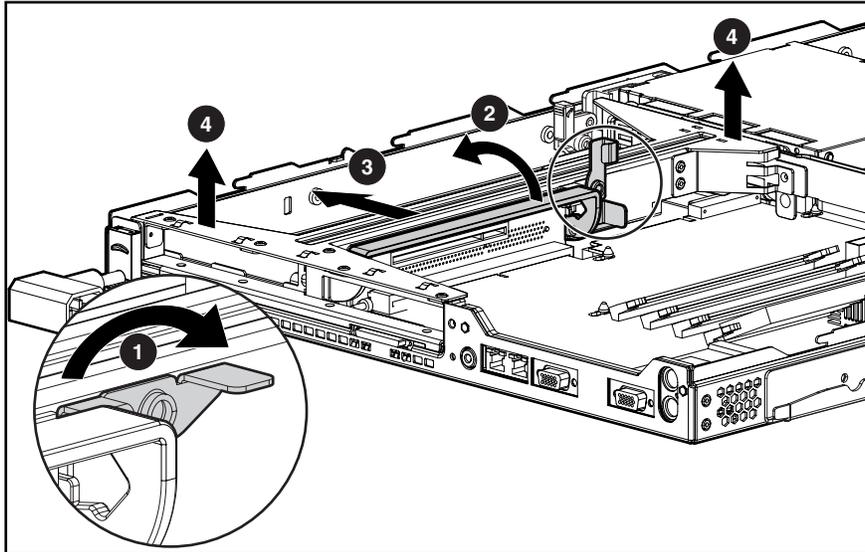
Removing the PCI riser board assembly (expansion boards removed for clarity)
